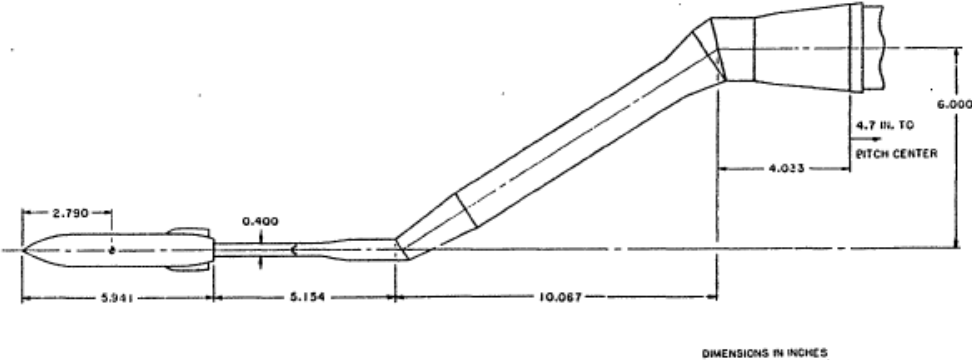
Sketch of the EGLIN Test Case Wind Tunnel Test
